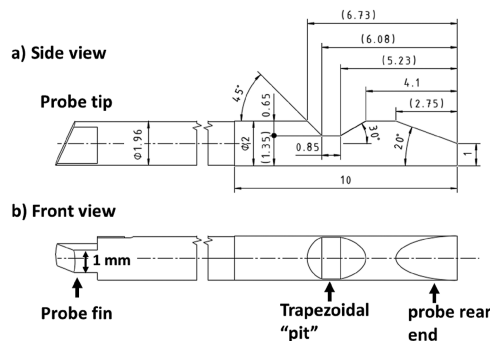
Engineering drawing of a probe. The probe tip has slightly different dimensions for each probe. (a) Side view of the probe tip showing the dimensions of different parts of the probe. All the lengths shown are in mm. (b) The front view of the probe showing the shapes of the probe fin, trapezoidal “pit,” and the wedge-shaped rear end of the probe.
